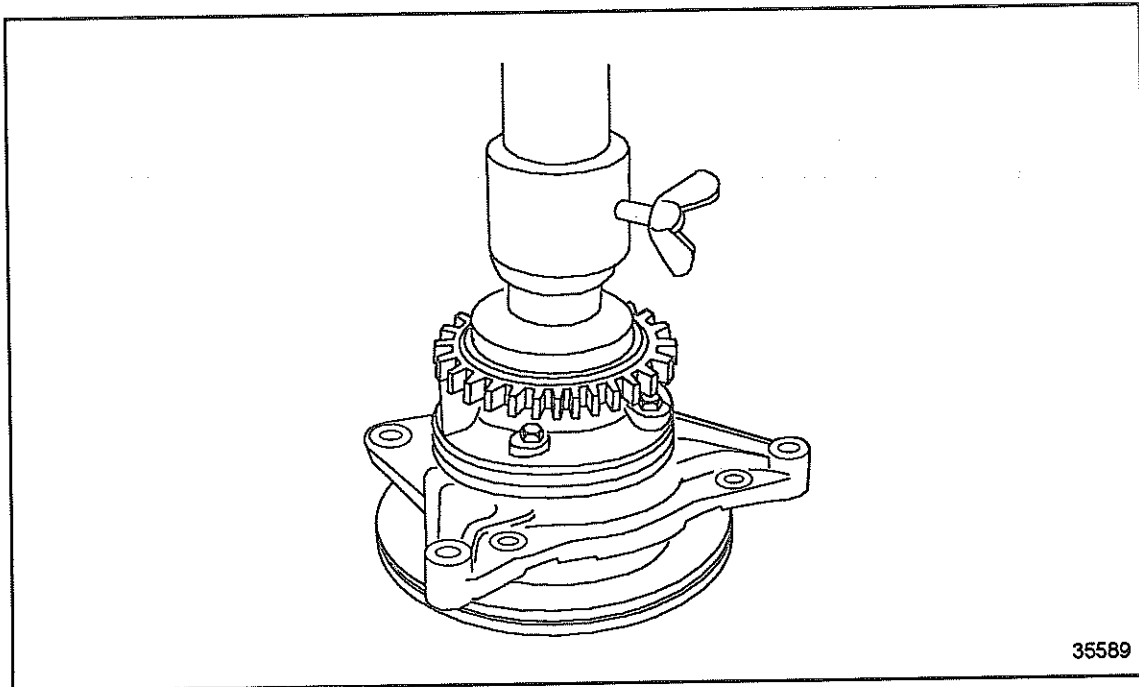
Pressing Bearing Housing onto Seal Carrier
